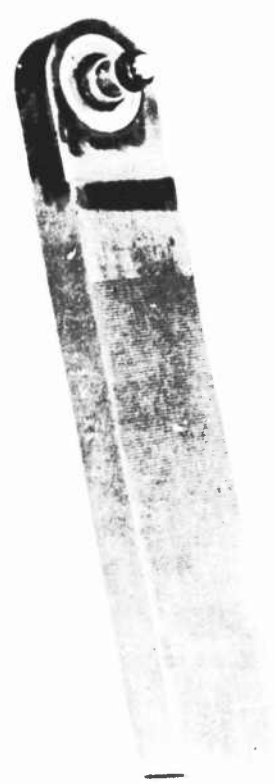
ALUMINUM PLATE FOR ATTACHMENT OF LEGS AFTER
